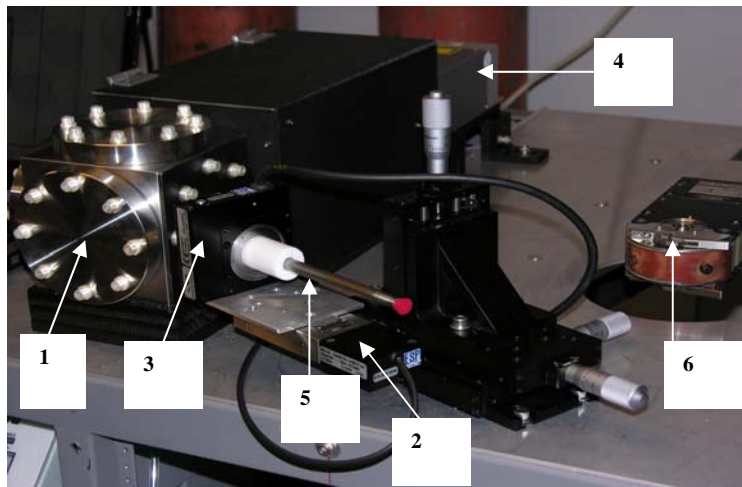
Laser cleaning and welding system on a small cart, 1) SS cleaning chamber, 2) X-translational stage, 3) Rotational stage, 4) Fiber laser, 5) Ti alloy tube, 6) Orbital welding head.
